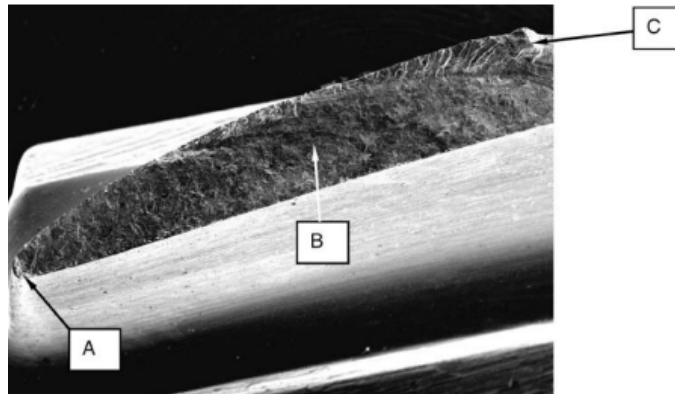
View of fractured blade with marked crack origin zone (A), fatigue fracture area (B), rupture zone (C) [2]
